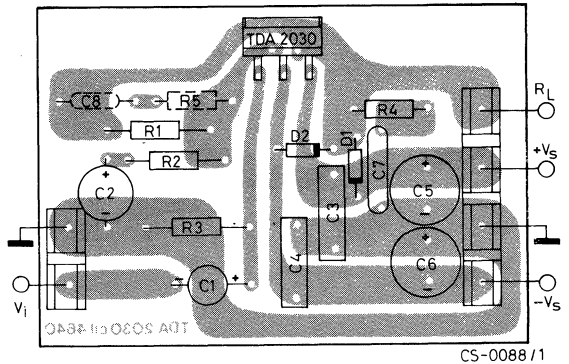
P.C. board and component layout for the circuit of fig. 13 (1:1 scale)
